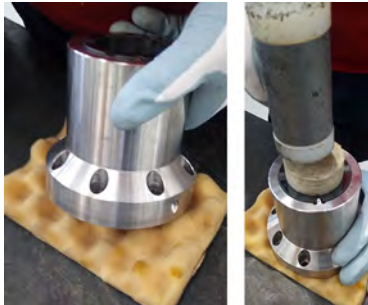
For the "2nd bracket" pumps, place the bushing bracket "seat" (352) on a soft surface. With a plastic buffer, extract the rear static bushing (545).
